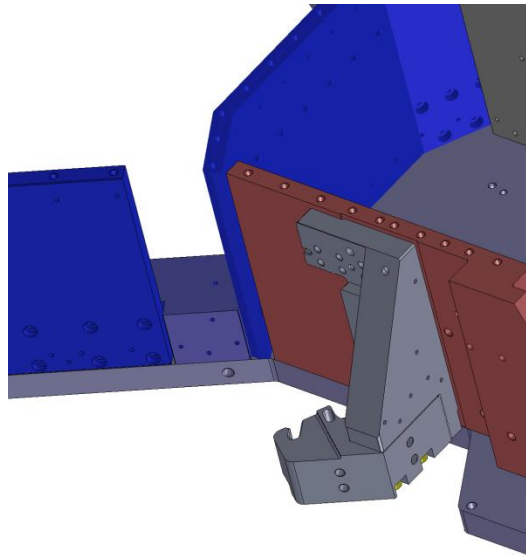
D0902425 Flexure Assembly mounted on D0902274 Flexure Wall
